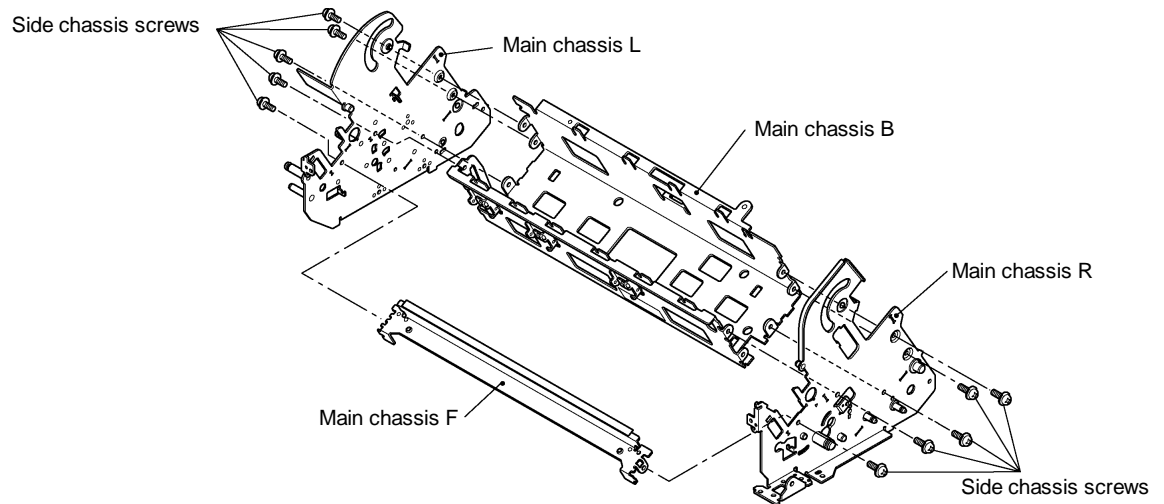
Removing the Main Chassis L, R, and F
